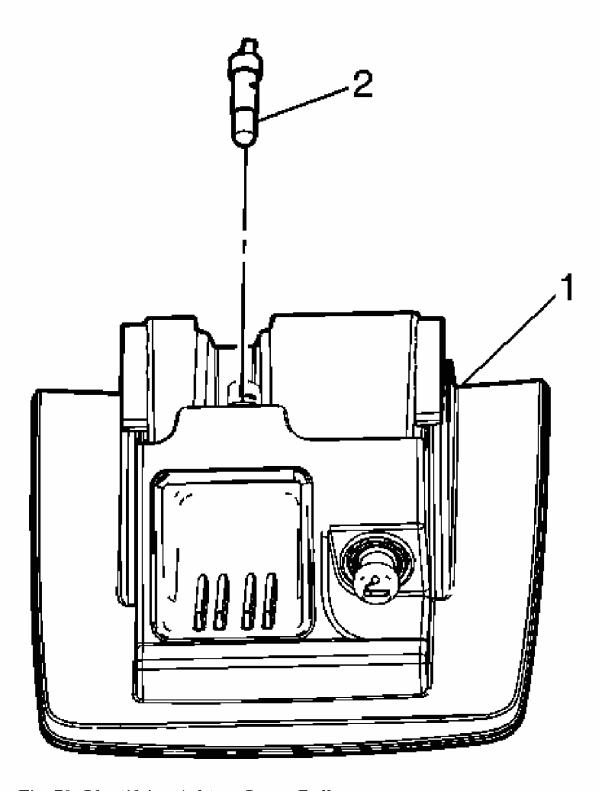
Identifying Ashtray Lamp Bulb Courtesy of GENERAL MOTORS CORP.
